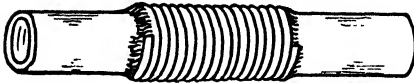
A leak in a tube may be repaired easily by (1) cleaning, fluxing, and tinning; (2) wrapping tightly with clean wire; and (3) applying solder over the wire.
